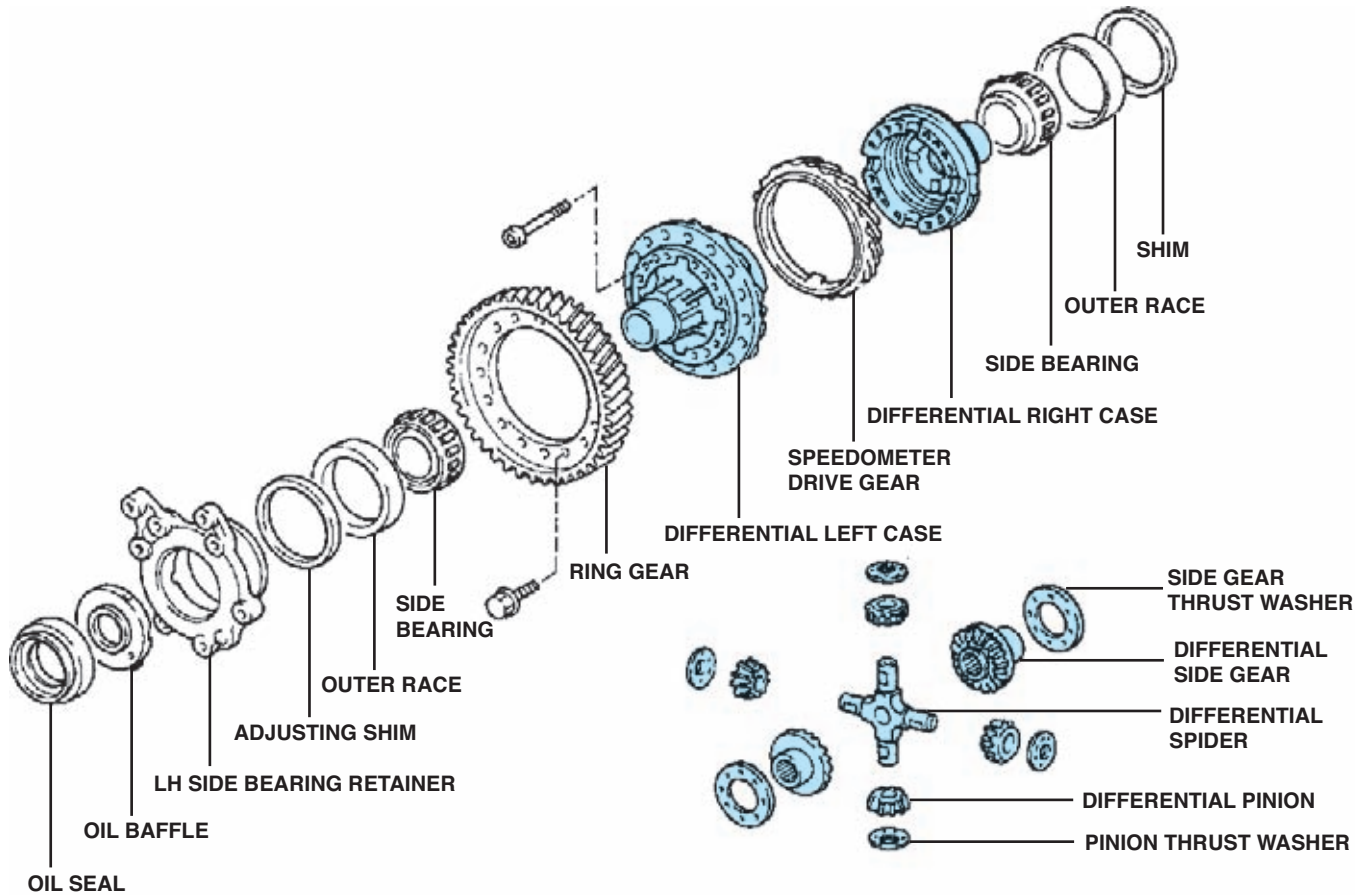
Exploded view of a differential. (Courtesy of Toyota Motor Sales USA, Inc.)
